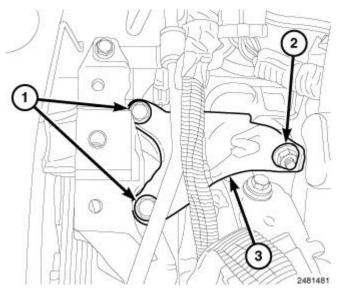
FUEL RAIL ASSEMBLY Courtesy of CHRYSLER LLC
